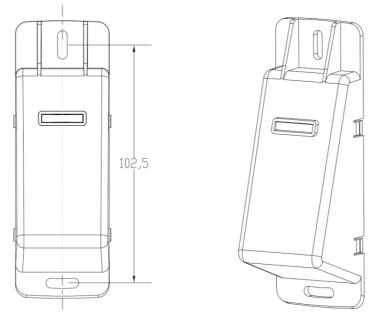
The mounting dimensions of the AXR-100/110 sensor (a view without the top cover) Notes:
